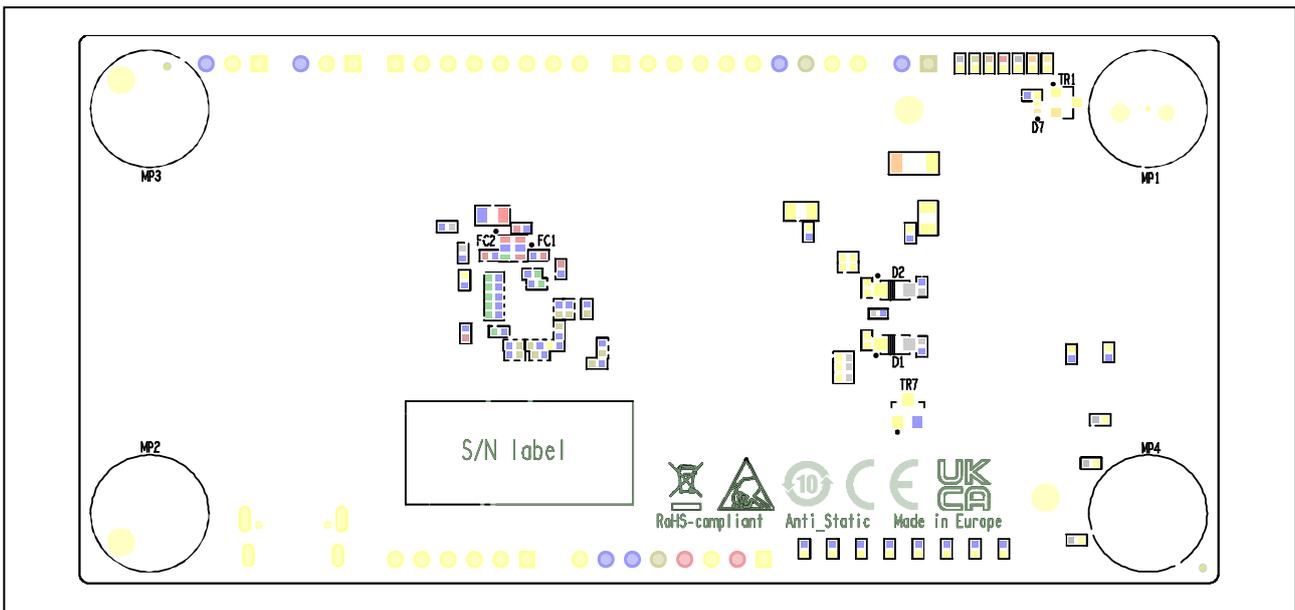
RH850/U2B10 target board with RAA271084 PMIC bottom view for board version D020090_06_V02
